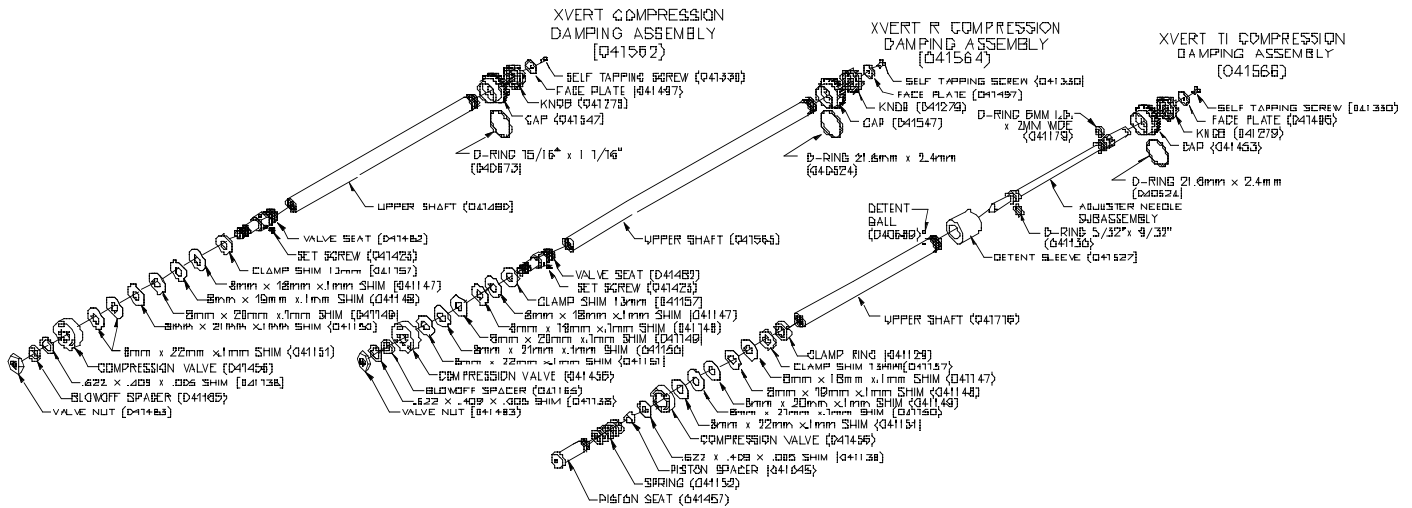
TPC COMPRESSION DAMPING ASSEMBLY
